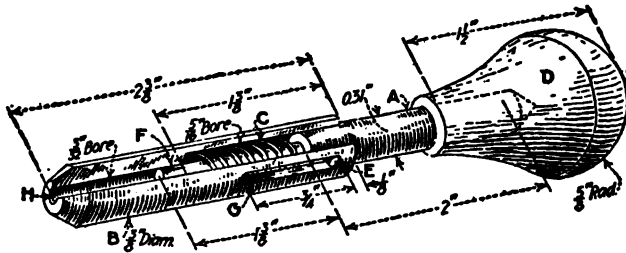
BRAD DRIVER FOR PATTERNMAKERS
